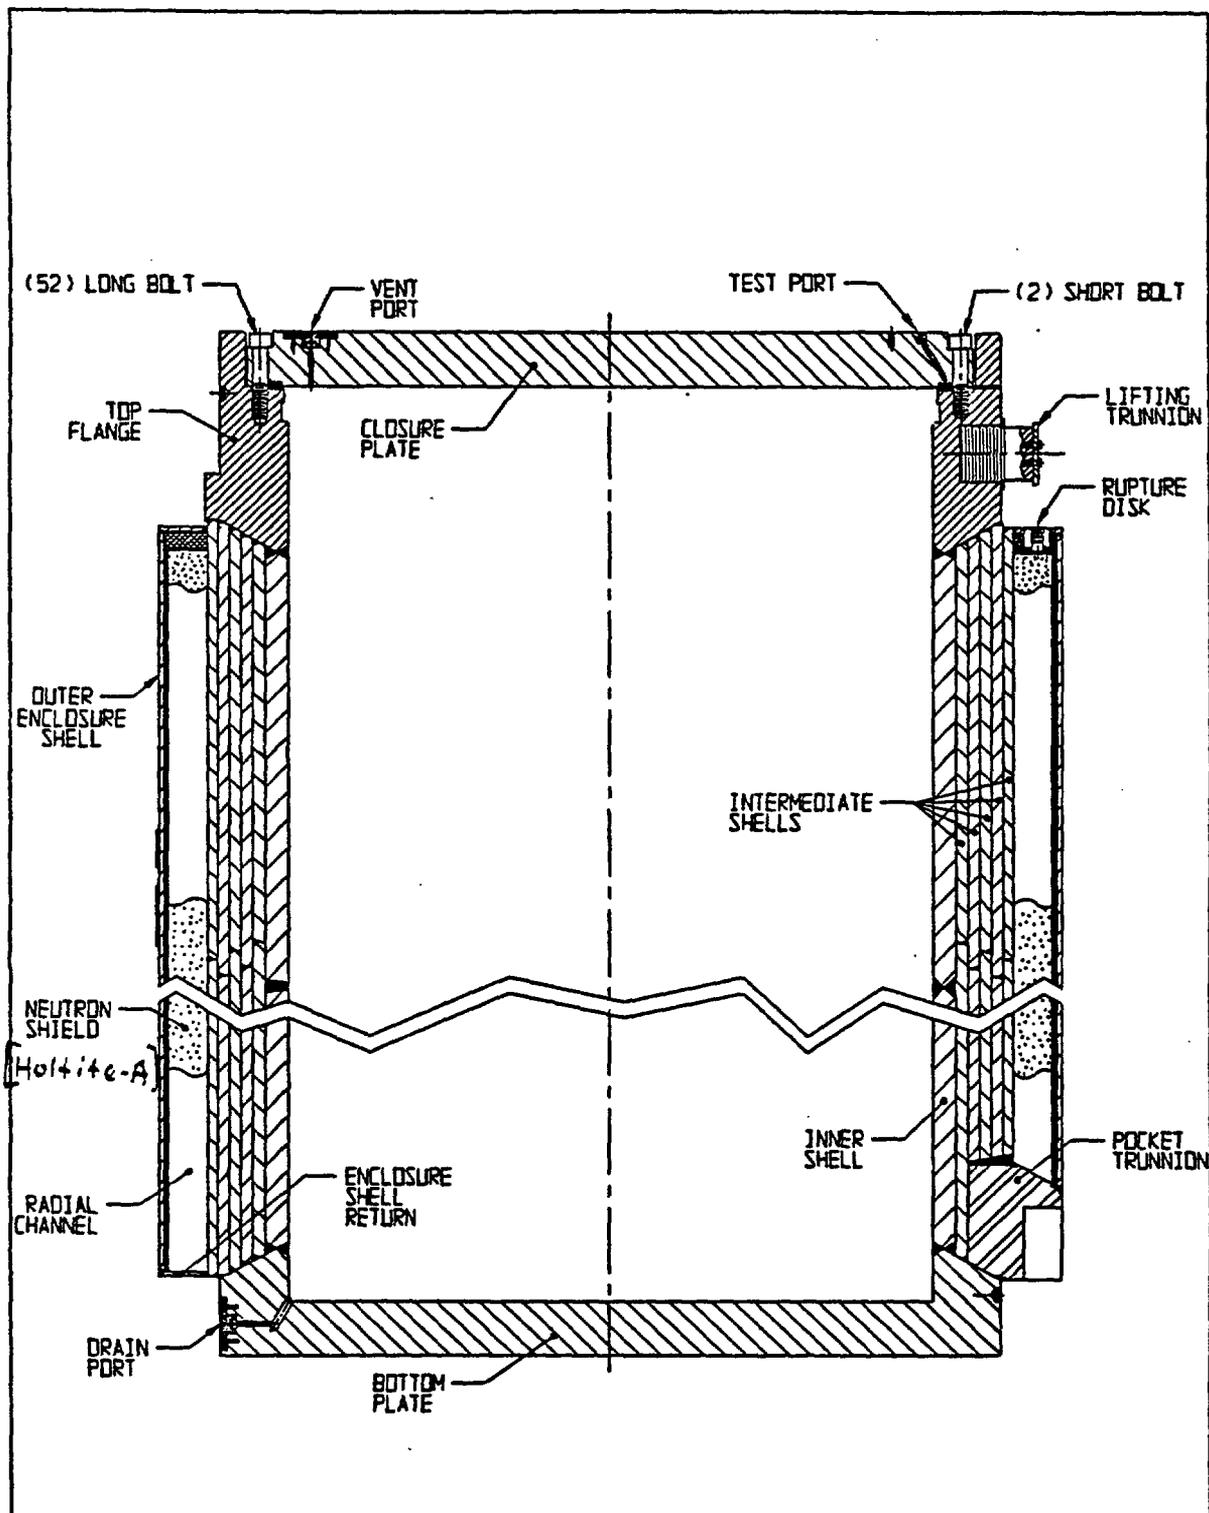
; CROSS SECTION ELEVATION VIEW OF OVERPACK
